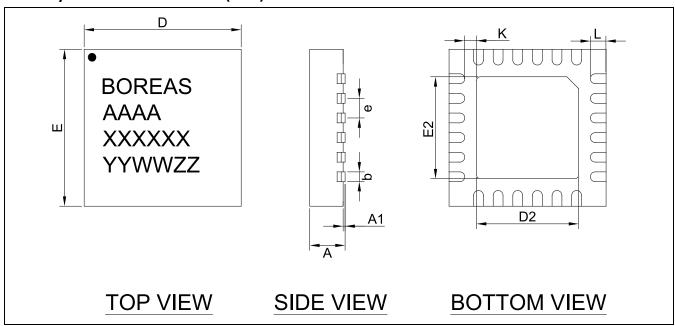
QFN 24L 4.0mm × 4.0mm package outline drawing
